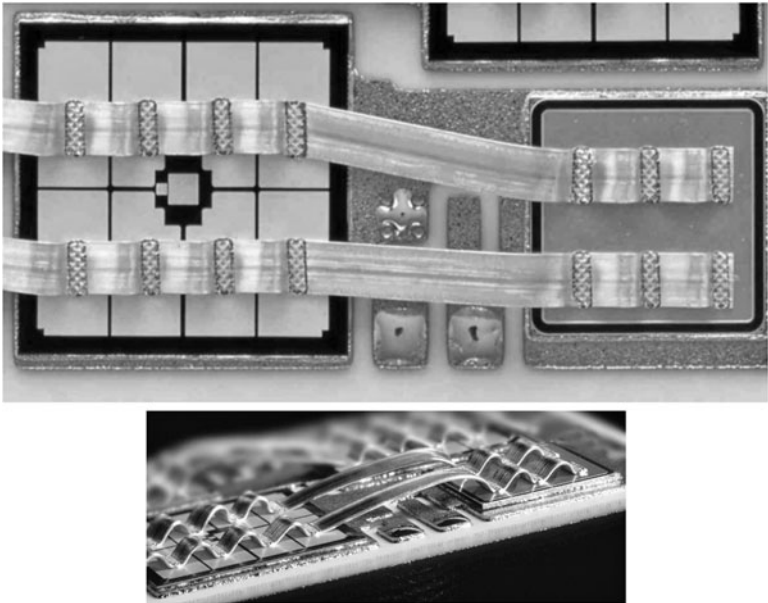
Photograph of devices bonded with large Al ribbon [80×8 mil (2×0.2 mm)], using a waffle pattern ultrasonic bonding tool. The upper picture is taken directly from the top and clearly reveals the patterned tool, and how such bonding can be oriented to connect die or pads that are displaced from a straight line. Lower figure is tipped to show the stress-relief looping between bonds. (Courtesy of Orthodyne Electronics.)
